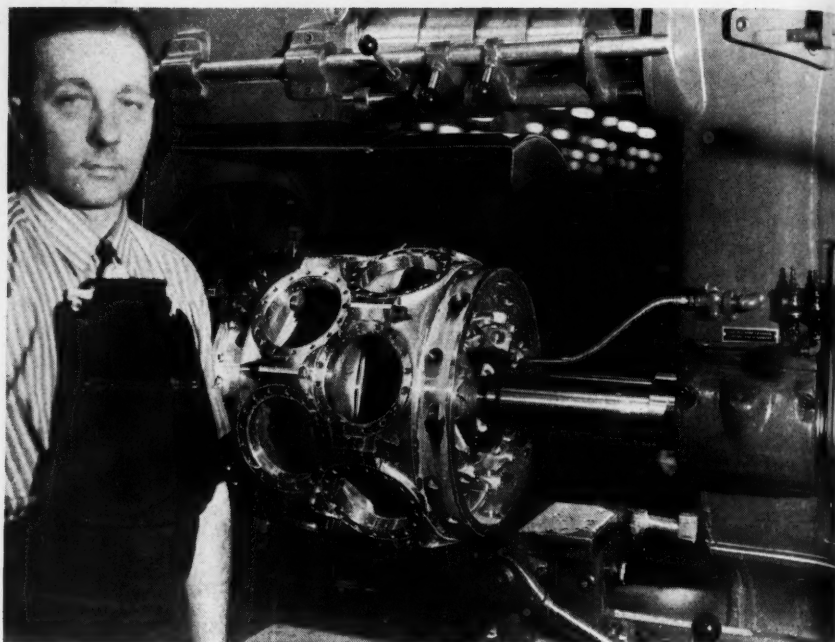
Grinding the front thrust bearing hole in the crankcase. When the hole is finished to size, the spindle withdraws automatically.
